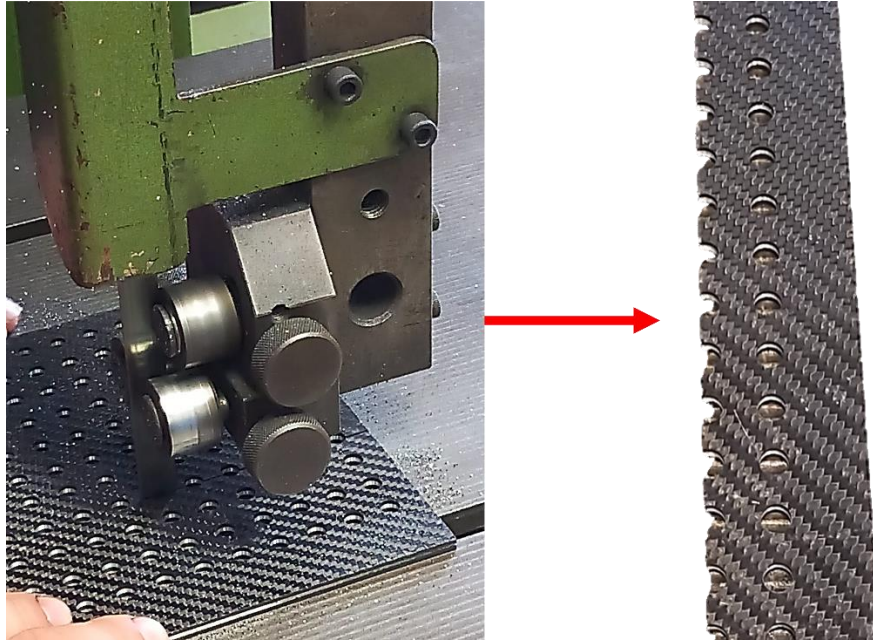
Use of the band saw machine to obtain the locations of the drilled holes to be measured.
